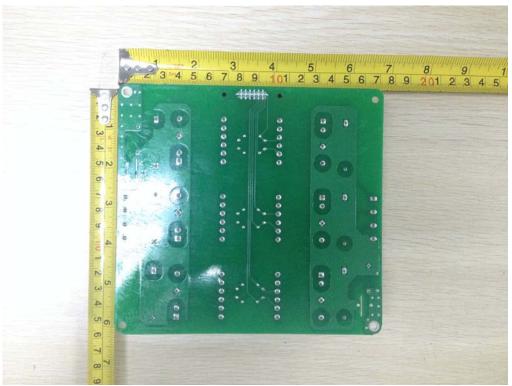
BYP&OUT-SAMPLE-C13 board trace view
